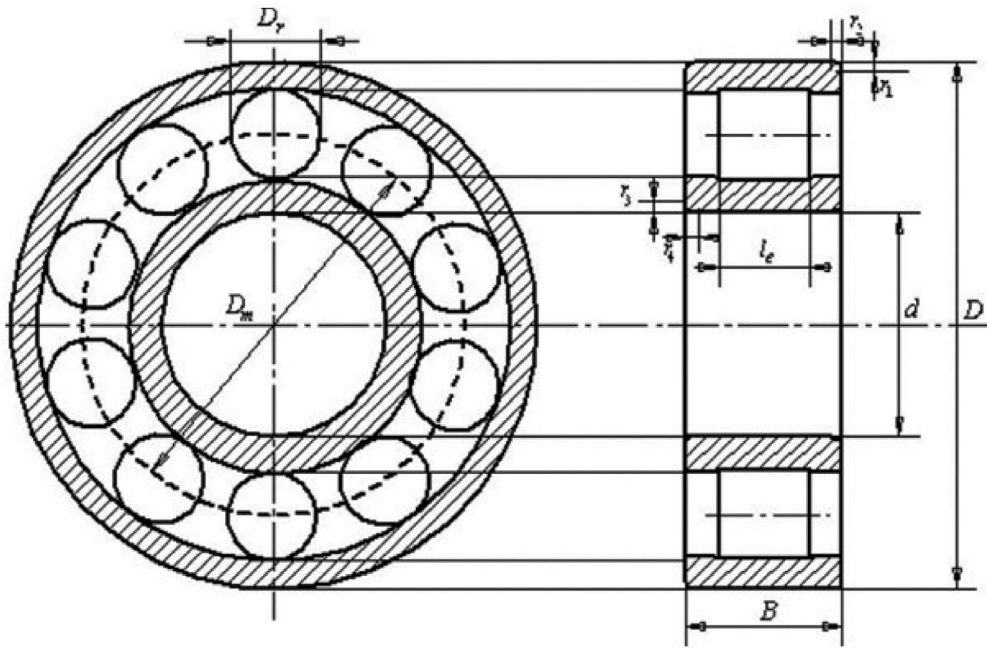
Schematic diagram of a cylindrical roller bearing [31].
